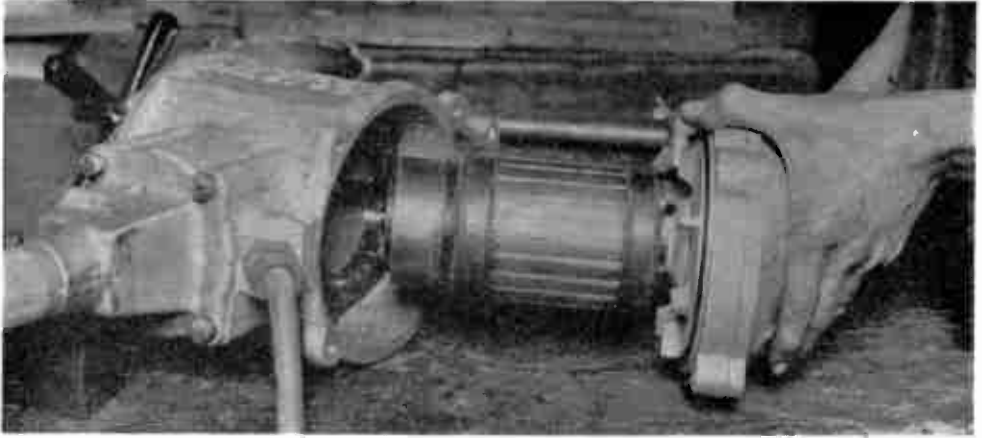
LIFTING OUT THE ARMATURE FROM THE GEAR CASE.
